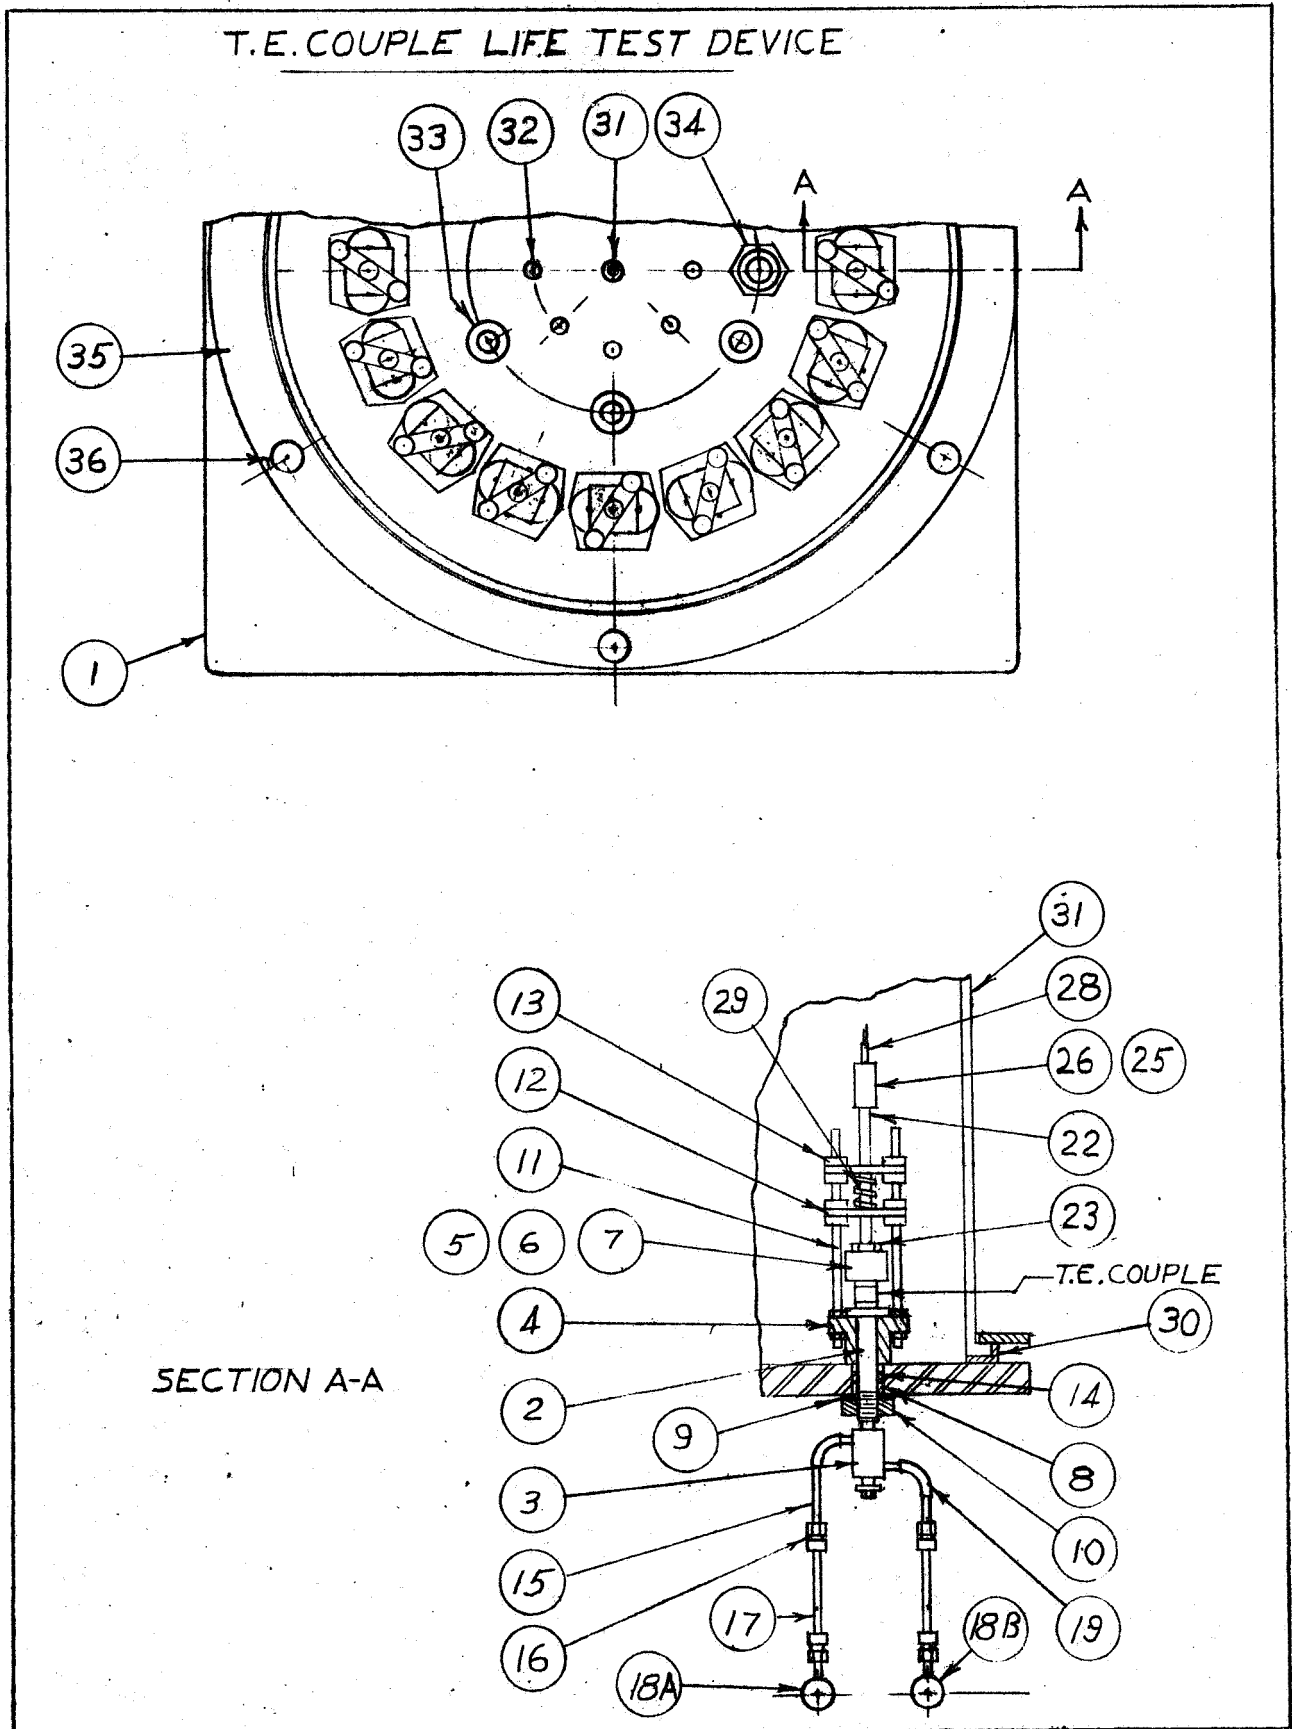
Plan view and section through one station of PbTe couple life test device.
